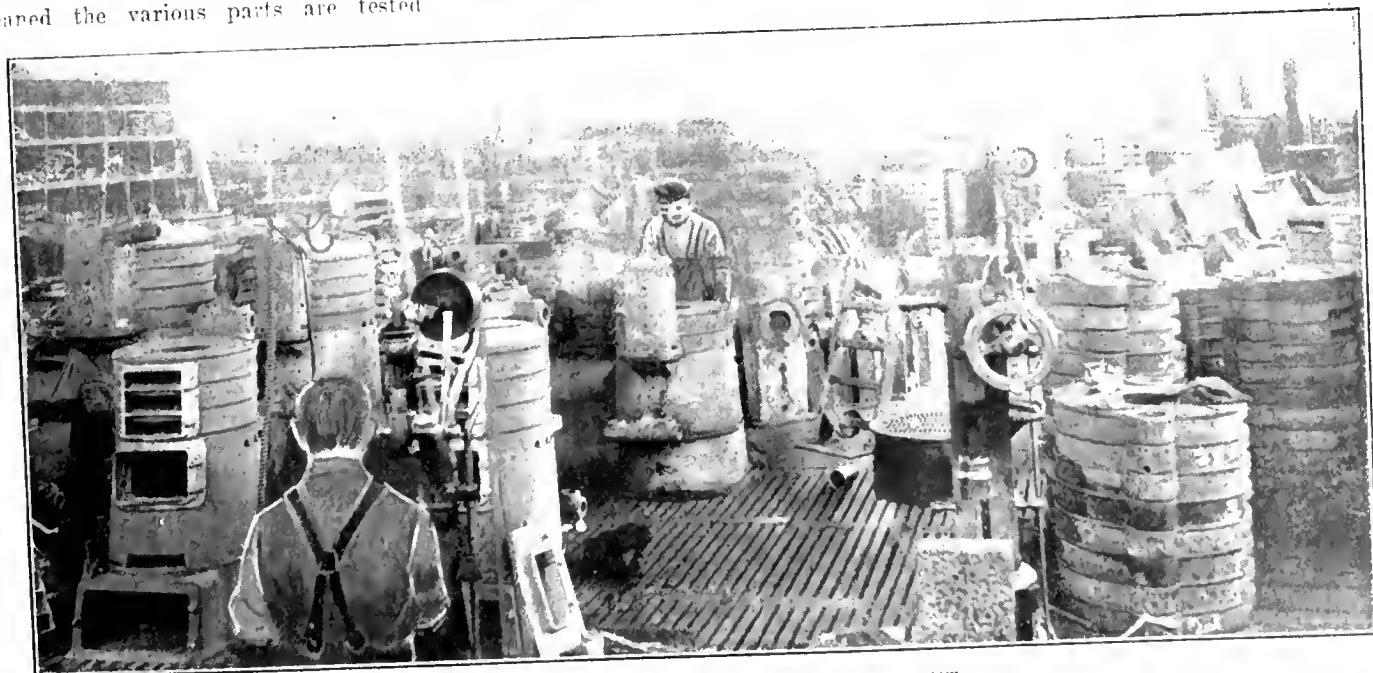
HEATING BOILER ASSEMBLY DEPARTMENT.
